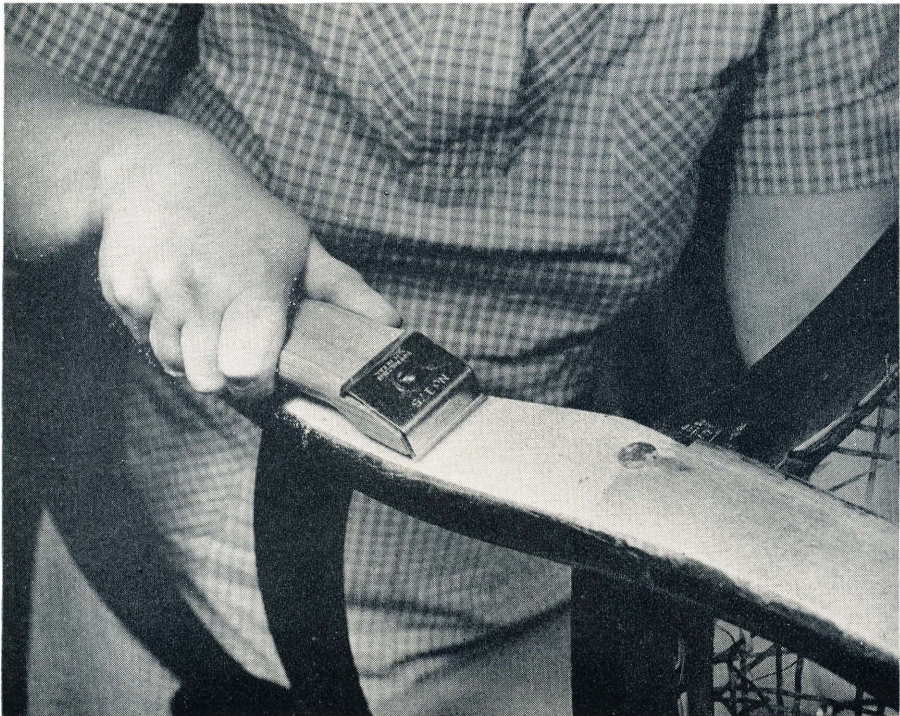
A scraper is used to remove the old finish from flat surfaces.
